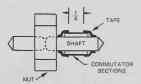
The two commutator sections are fastened to the shaft with platic tape.
